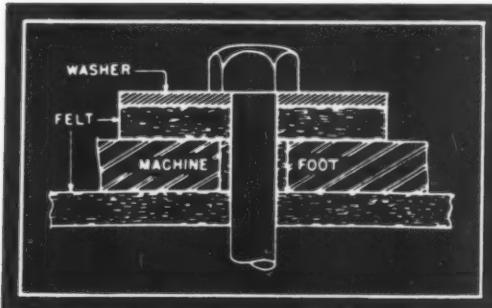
Felt washer between machine foot and bolt head reduces vibration force transmitted through the bolt
